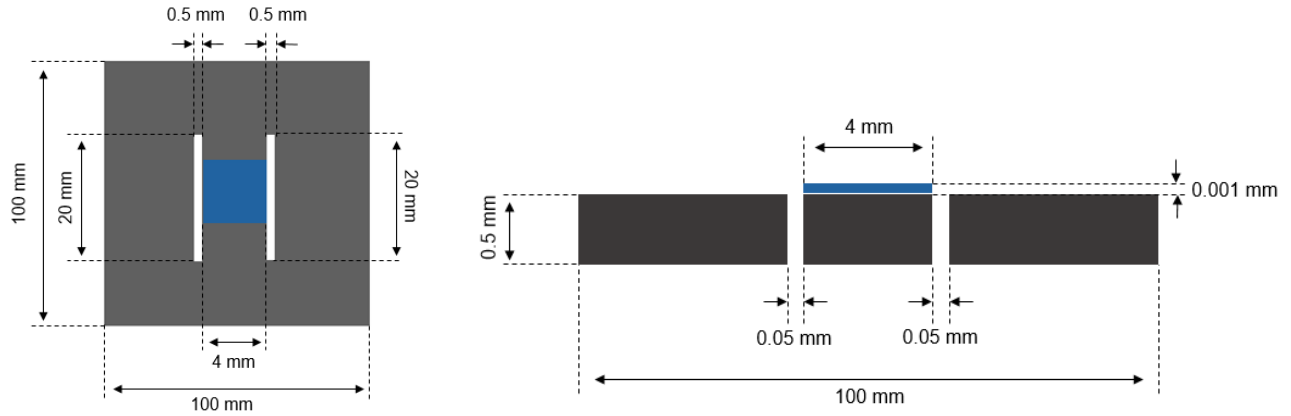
Drawing of the double slit concept with dimensions. Not drawn to scale.
